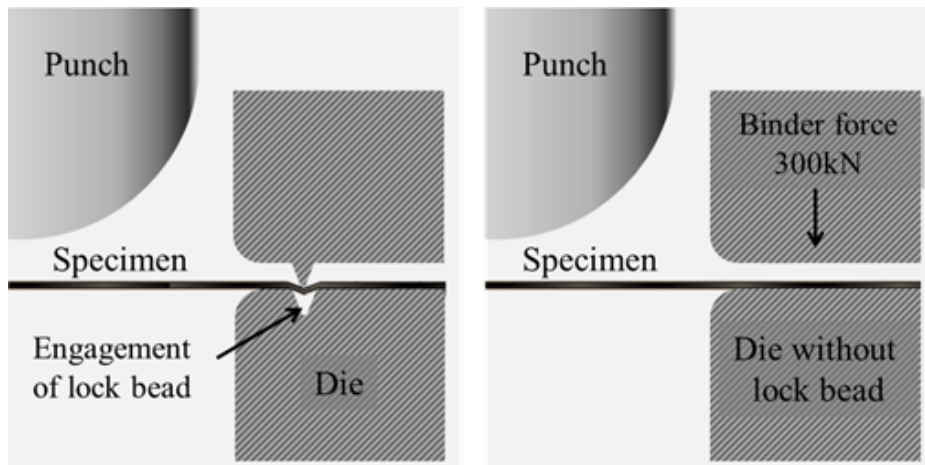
Initial LDH tooling with the engagement of lock bead (left); LDH tooling used in the current investigation without lock bead (right).
